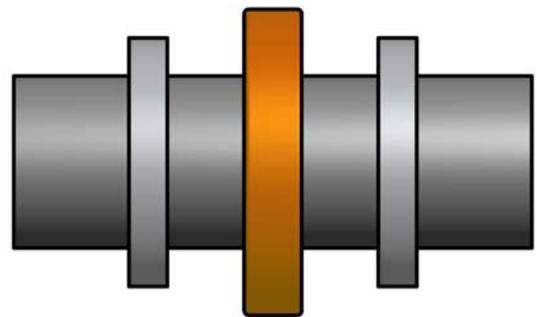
Checking alignment of pipe ends. Adjust as required.
